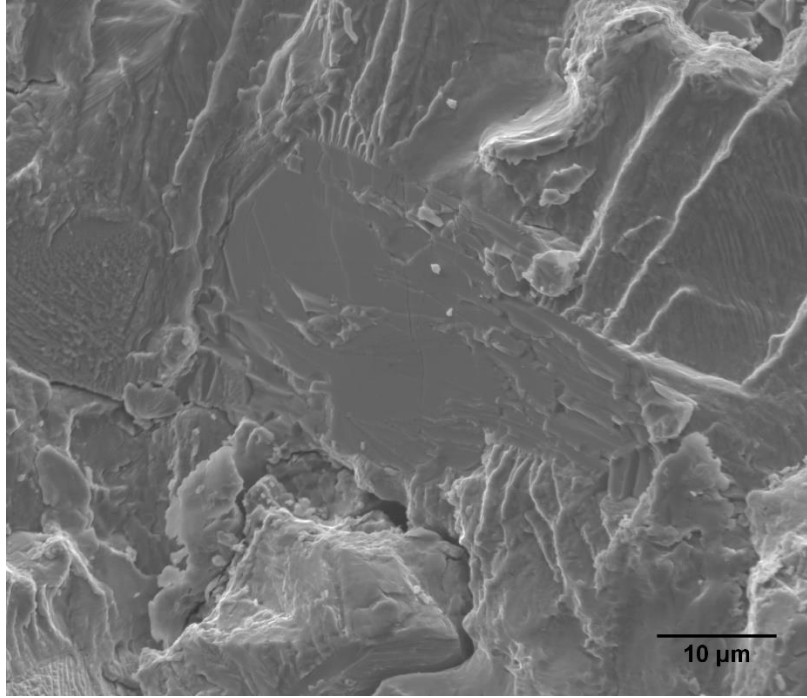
Fracture surface with cleavage fracture and striations
